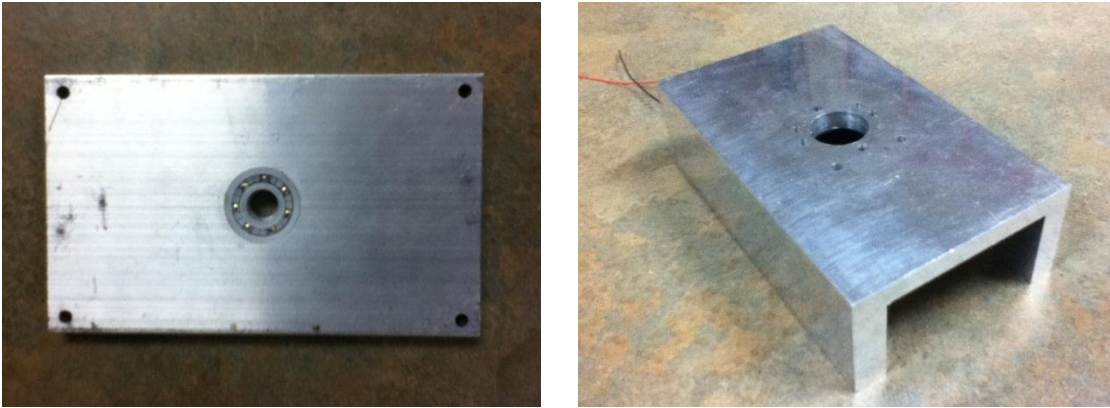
Aluminum base with bearing (left) and generator mount (right).
